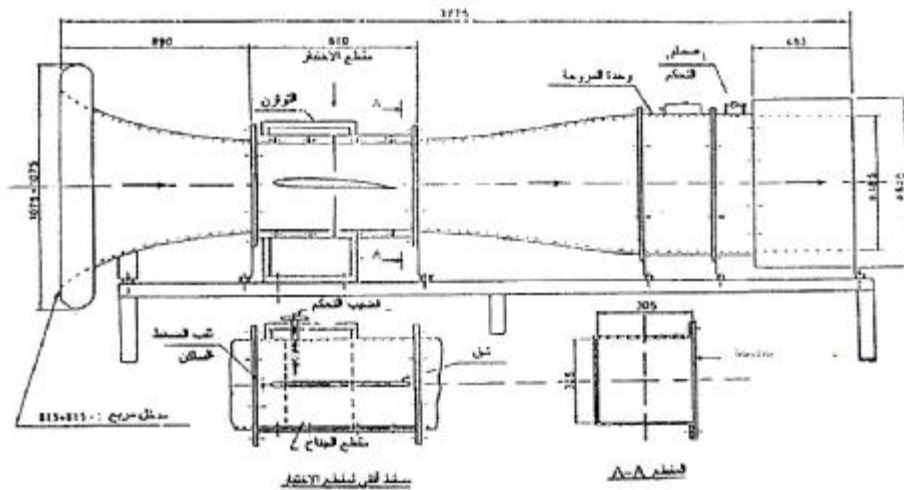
Wind Tunnel Dimension [all dimensions in mm]
